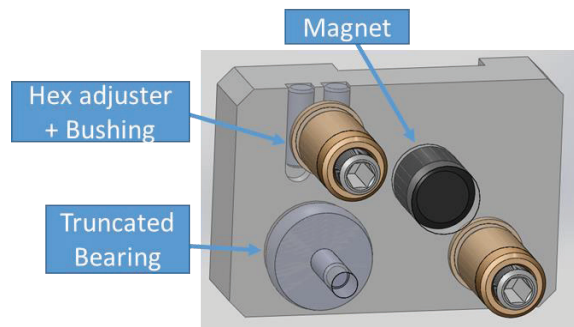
Kelvin clamp mechanism using two fine pitch adjustment screws in a V-groove and flat which tip and tilt the mount about a ball bearing pivoting from a cone. The mount position is held in place by a magnet.
